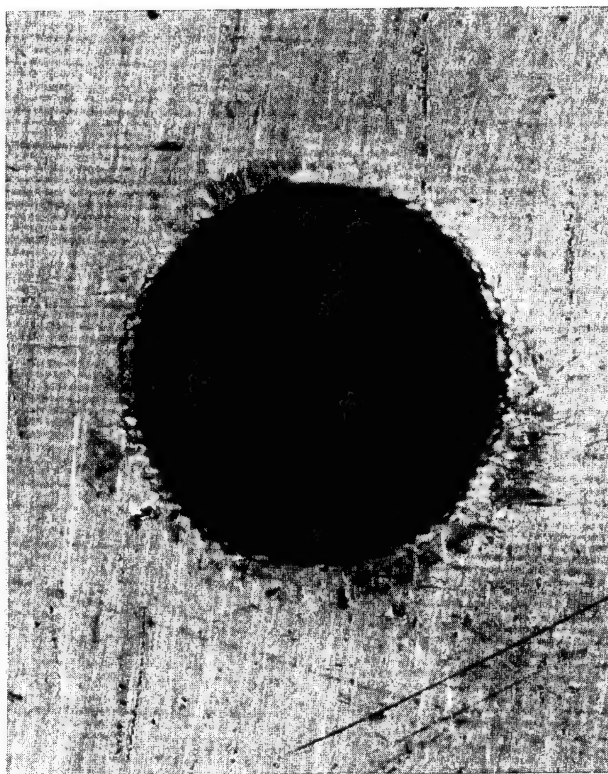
Hole Produced by 6.350mm(0.250 in) Diameter Steel Drill
